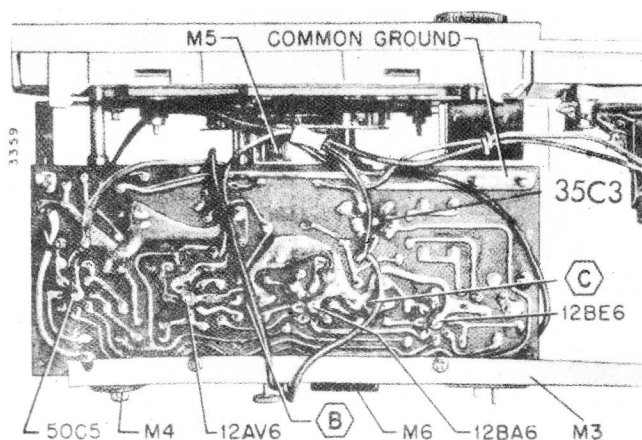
Bottom View of Chassis. Location of tubes and alignment points shown.
